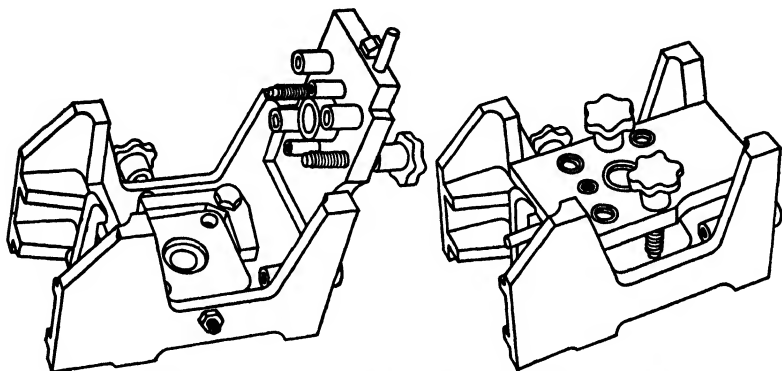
Locking knuckles, latches, and fixed bushings.
